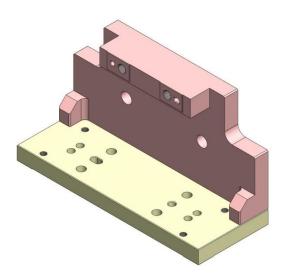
Bolt on Set-Up Fixture Plate 1 (D071316).
